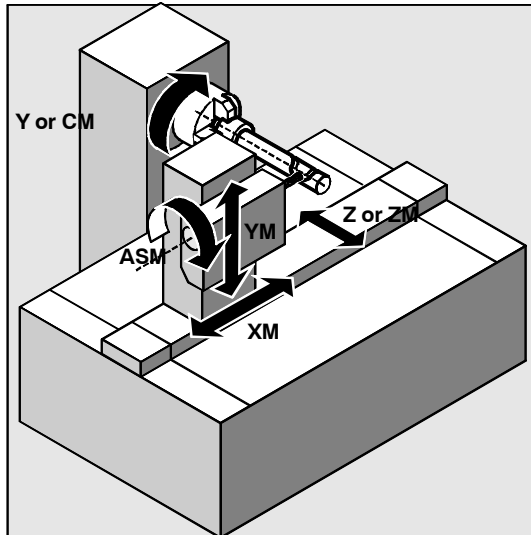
Machine kinematics with a machine Y axis (YM)
